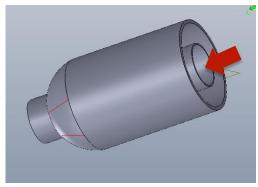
Leaflet valve cutaway view and placement.⁶ Created in Solidworks.
